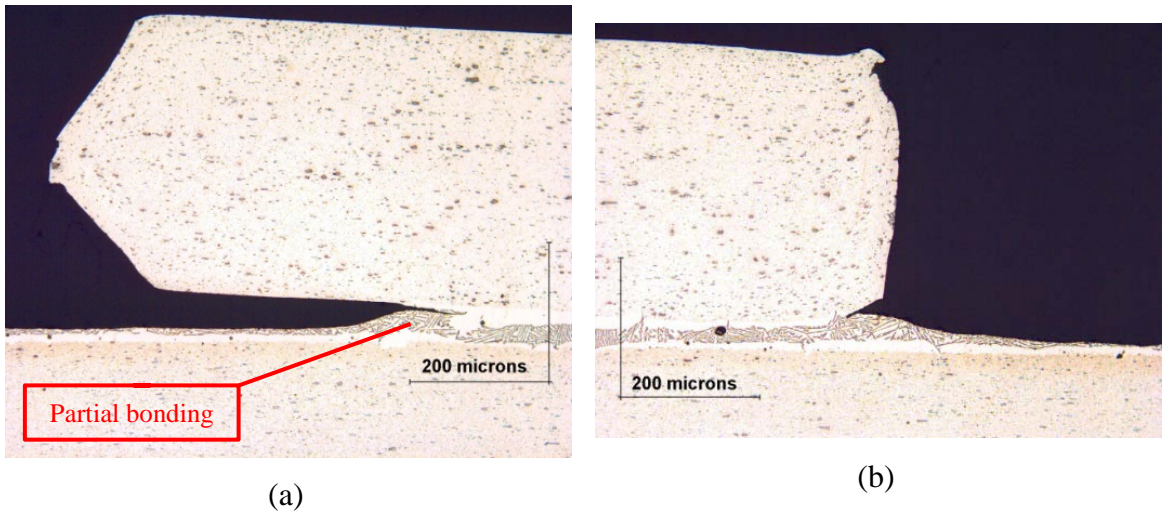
Metallurgical Photos of Trillium™ Brazed Sample in Air (a) Left Joint and (b) Right Joint. Test II.
